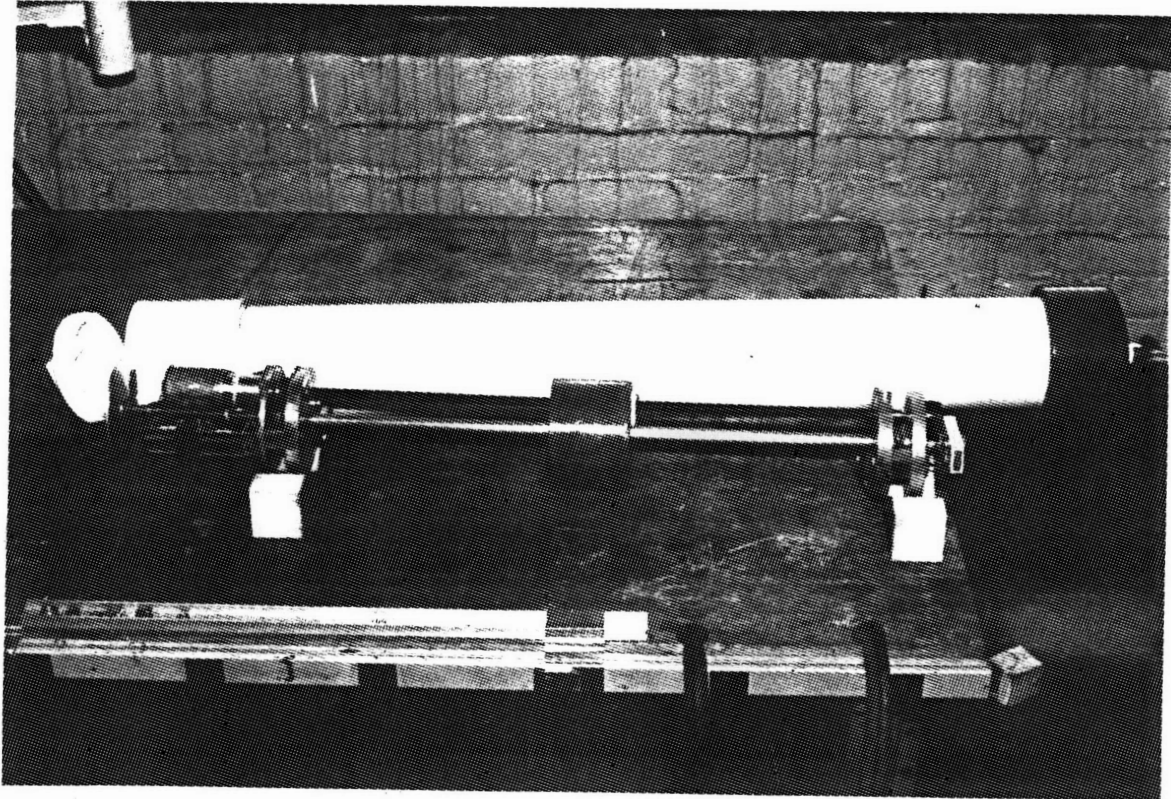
Photograph of Balancer Assembly and PVC Tube
